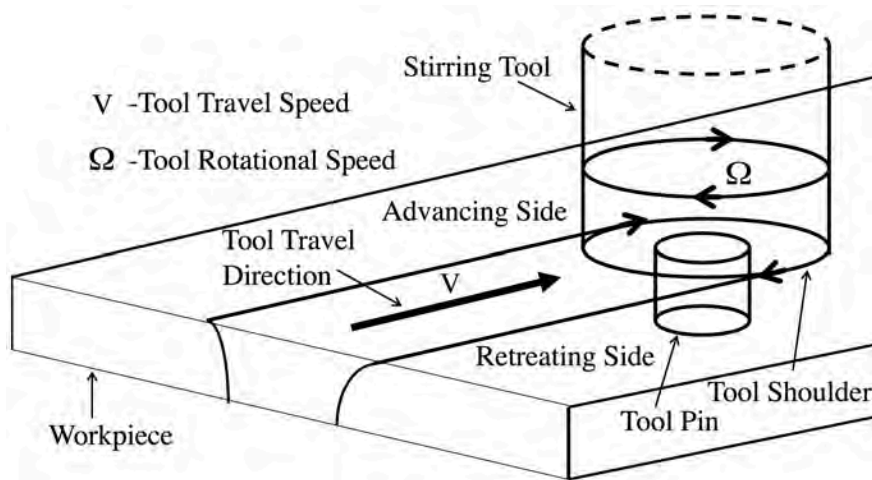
Schematic representation of friction stir welding and processing.
